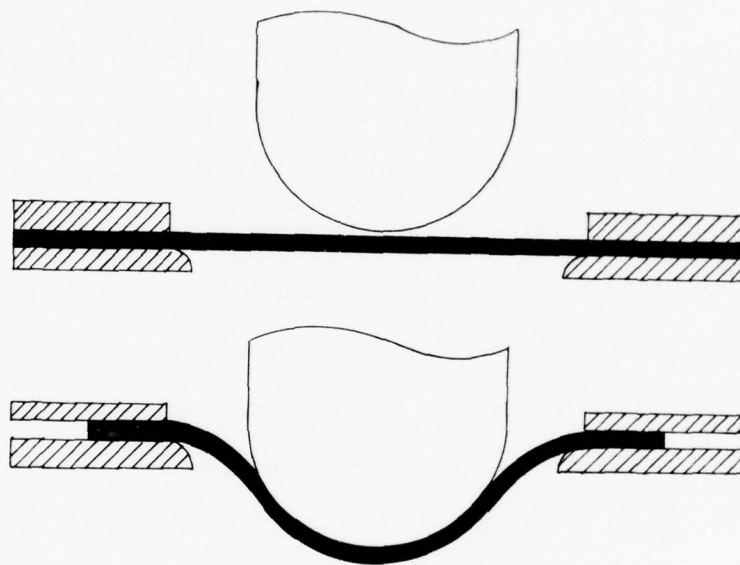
Schematic View of Deep Drawing of a Sheet with a Hemispherical Head Punch
